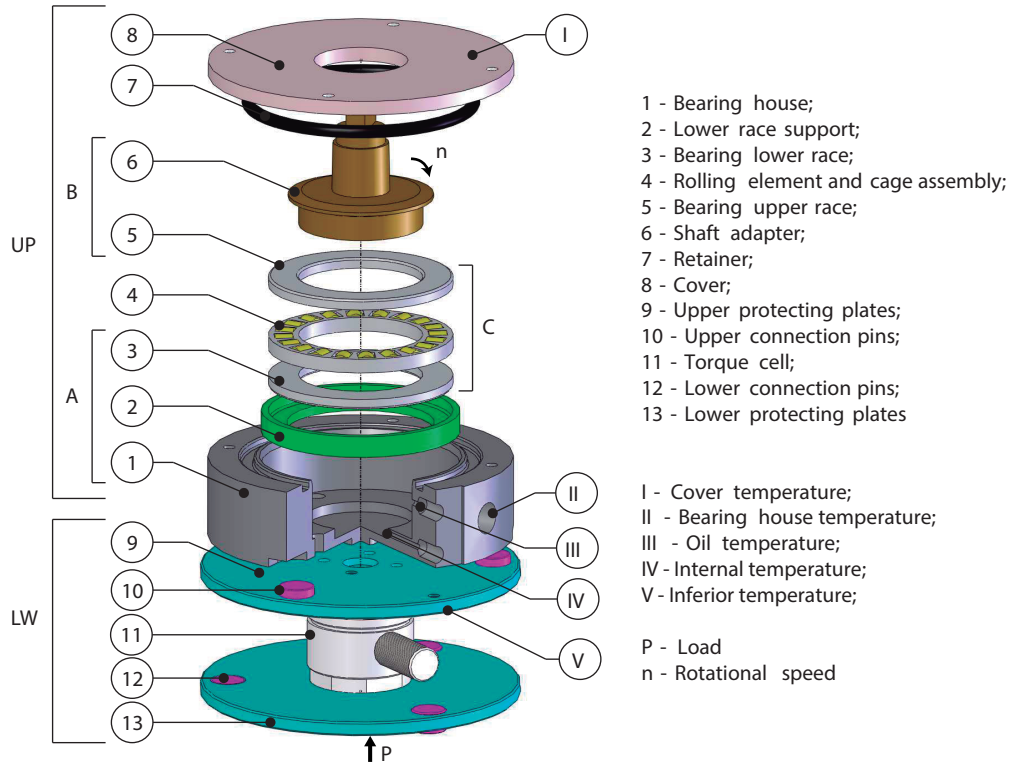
Schematic view of the rolling bearing assembly with a cylindrical roller thrust bearing.
